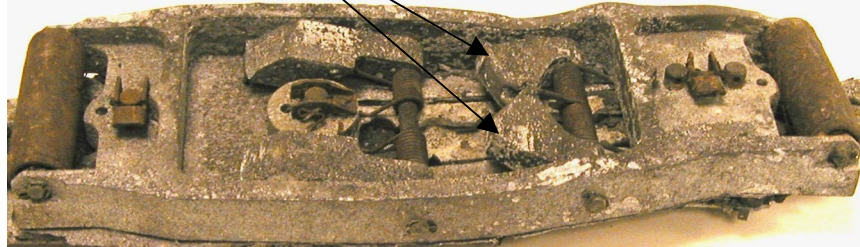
Figure IV: Cargo Lock, “Fractured Inner Pawl (Legs)”
